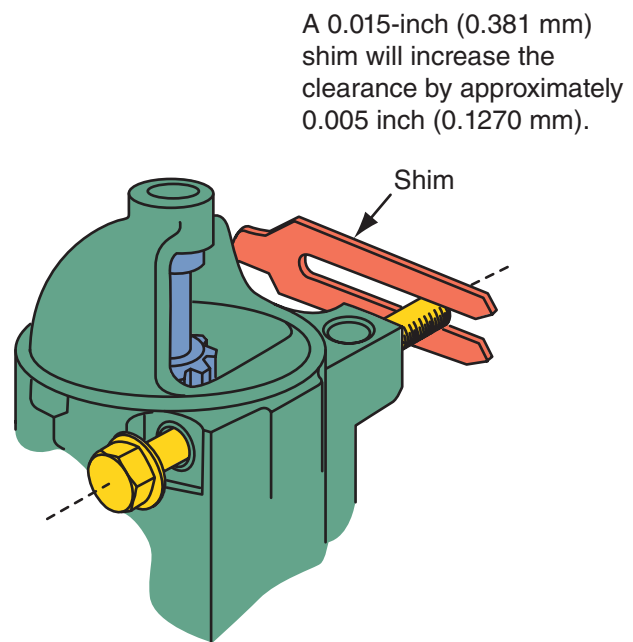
Shimming the starter to obtain proper pinion-to-ring gear clearance.
